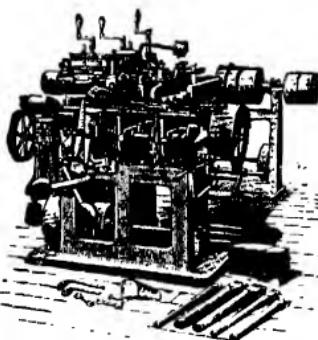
SPOKE-TENONING AND THROATING MACHINE.
